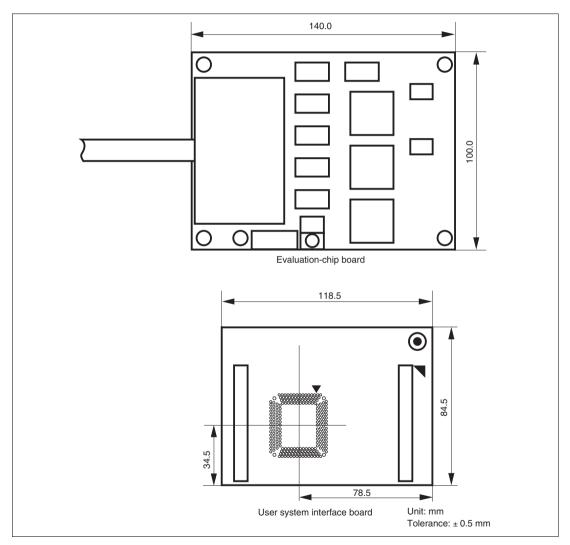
Dimensions of the Evaluation-Chip Board and the User System Interface Board
